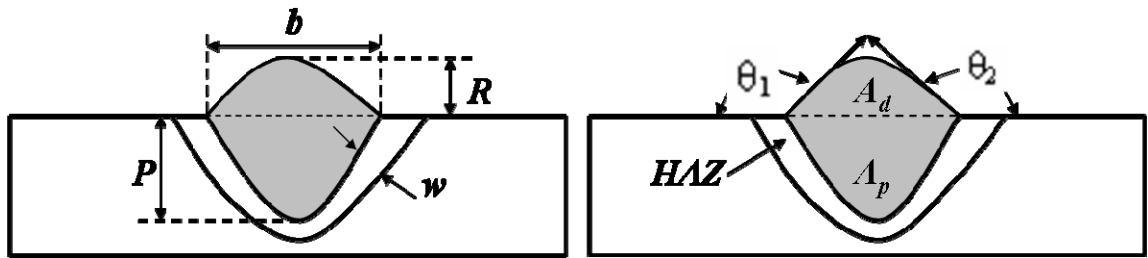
Schematic illustration of the measurements required for determining welding performance.
